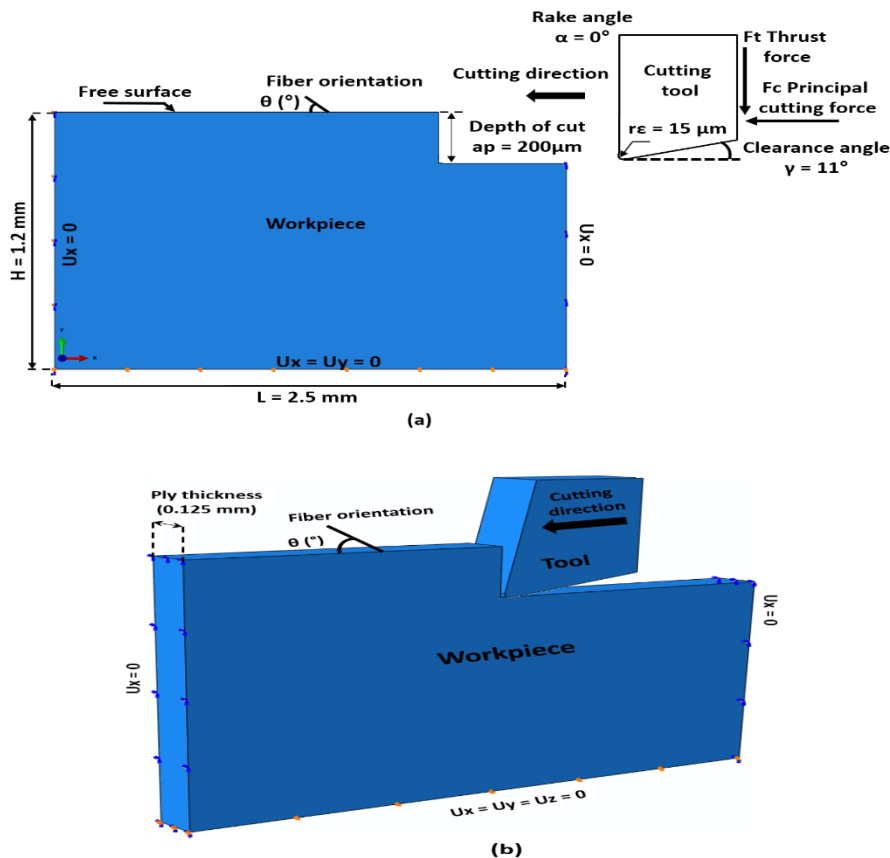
(a) Boundary condition and dimensions of the workpiece and the cutting tool for (a) 2D Model and (b) 3D Model
